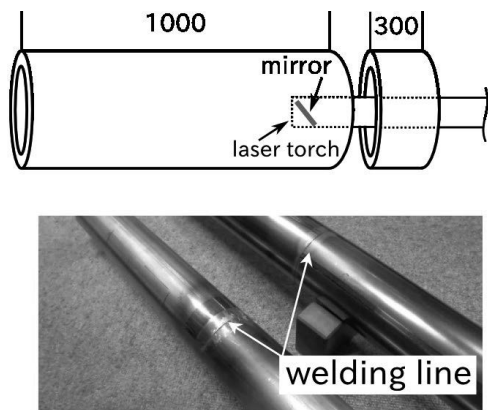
Schematic illustration of the Laser Beam Butt Welding and the actual test pipe.
